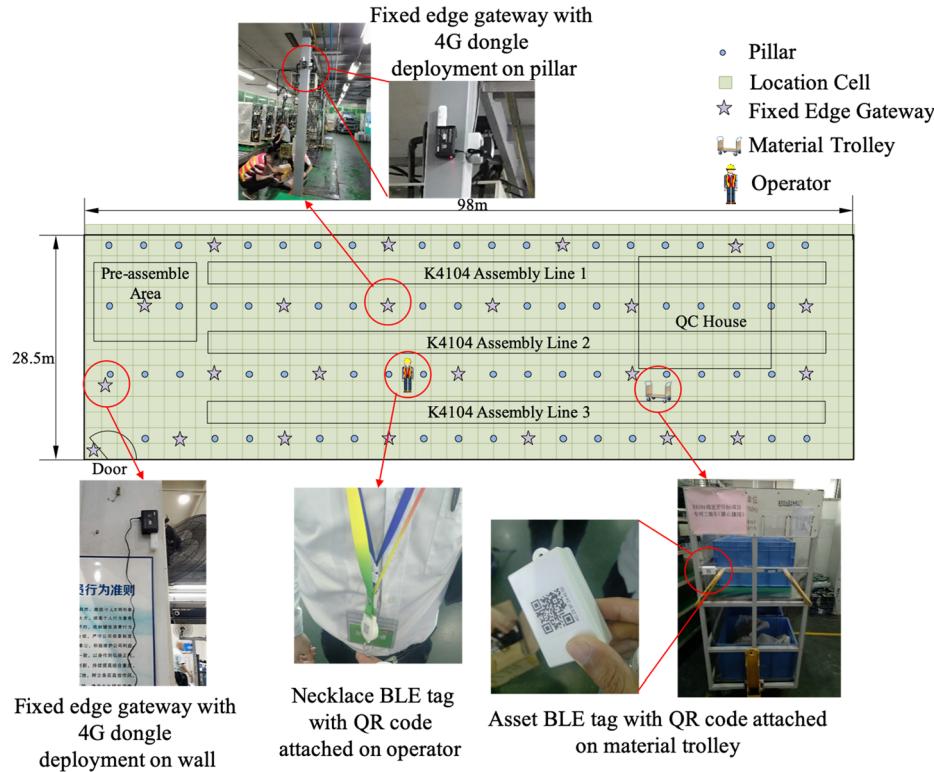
One floor of the indoor plant layouts and hardware implementation.
